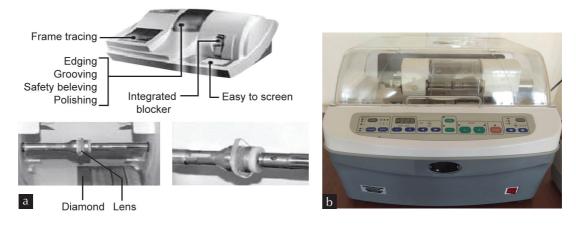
and b: (a) Automated grinding machine; (b) Automated machine
